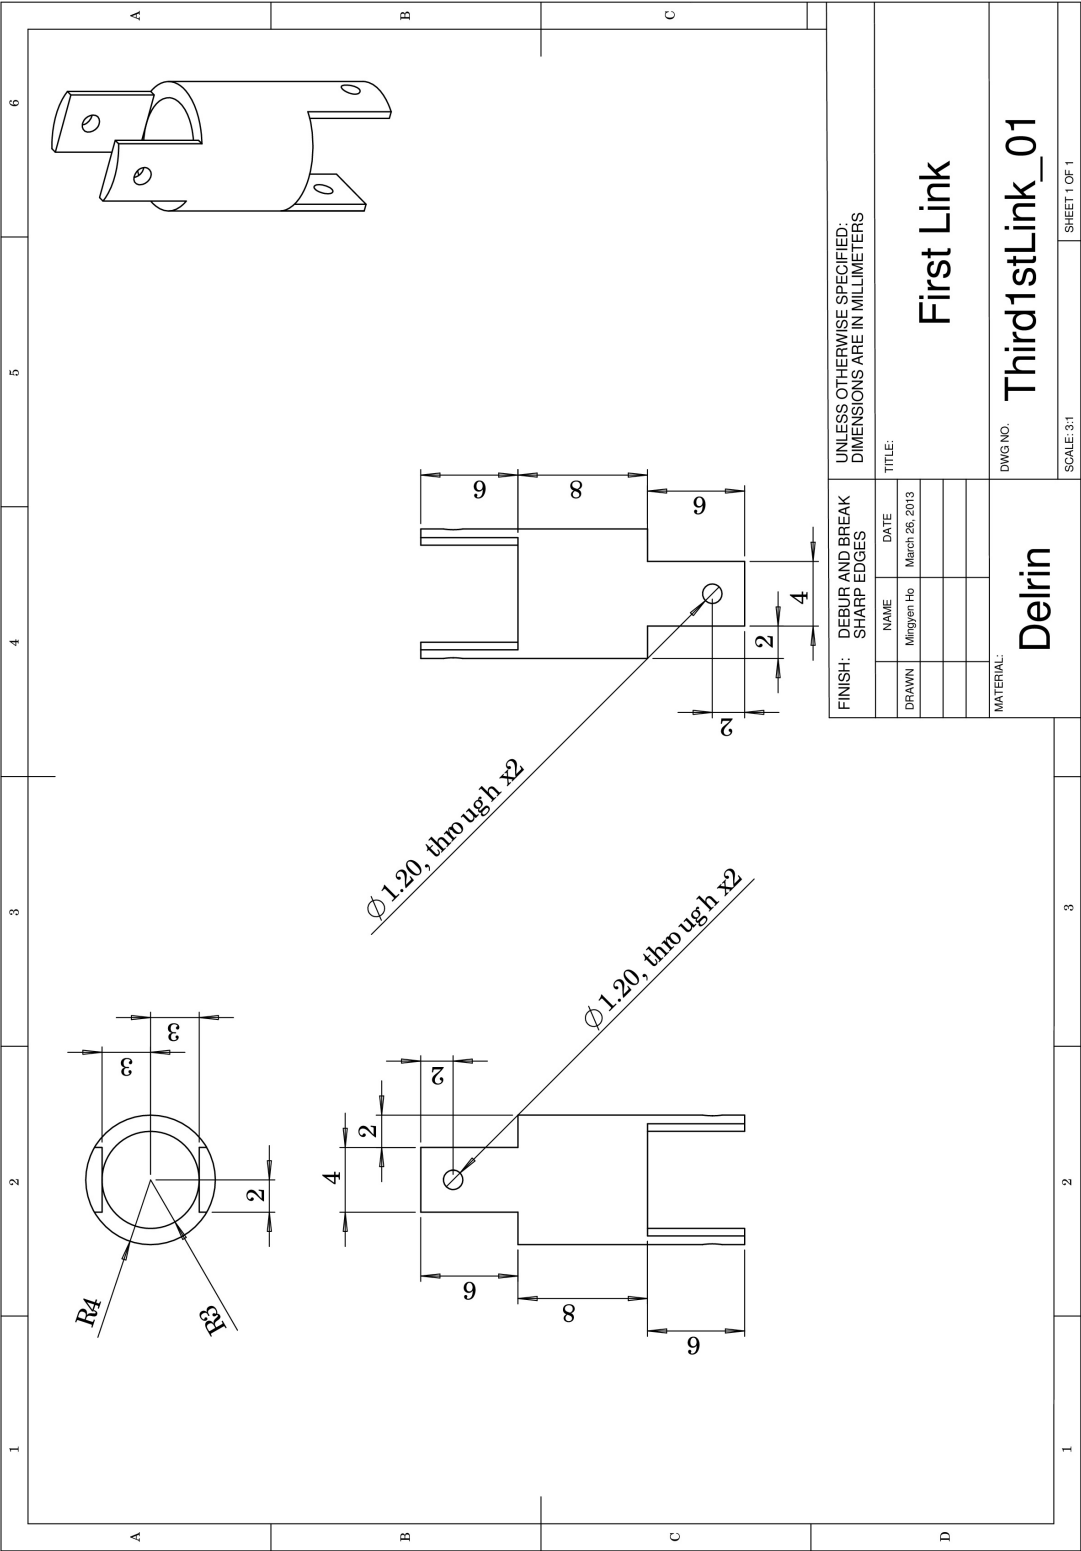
Engineering drawing of the first link of the SMA spring actuated MINIR.
